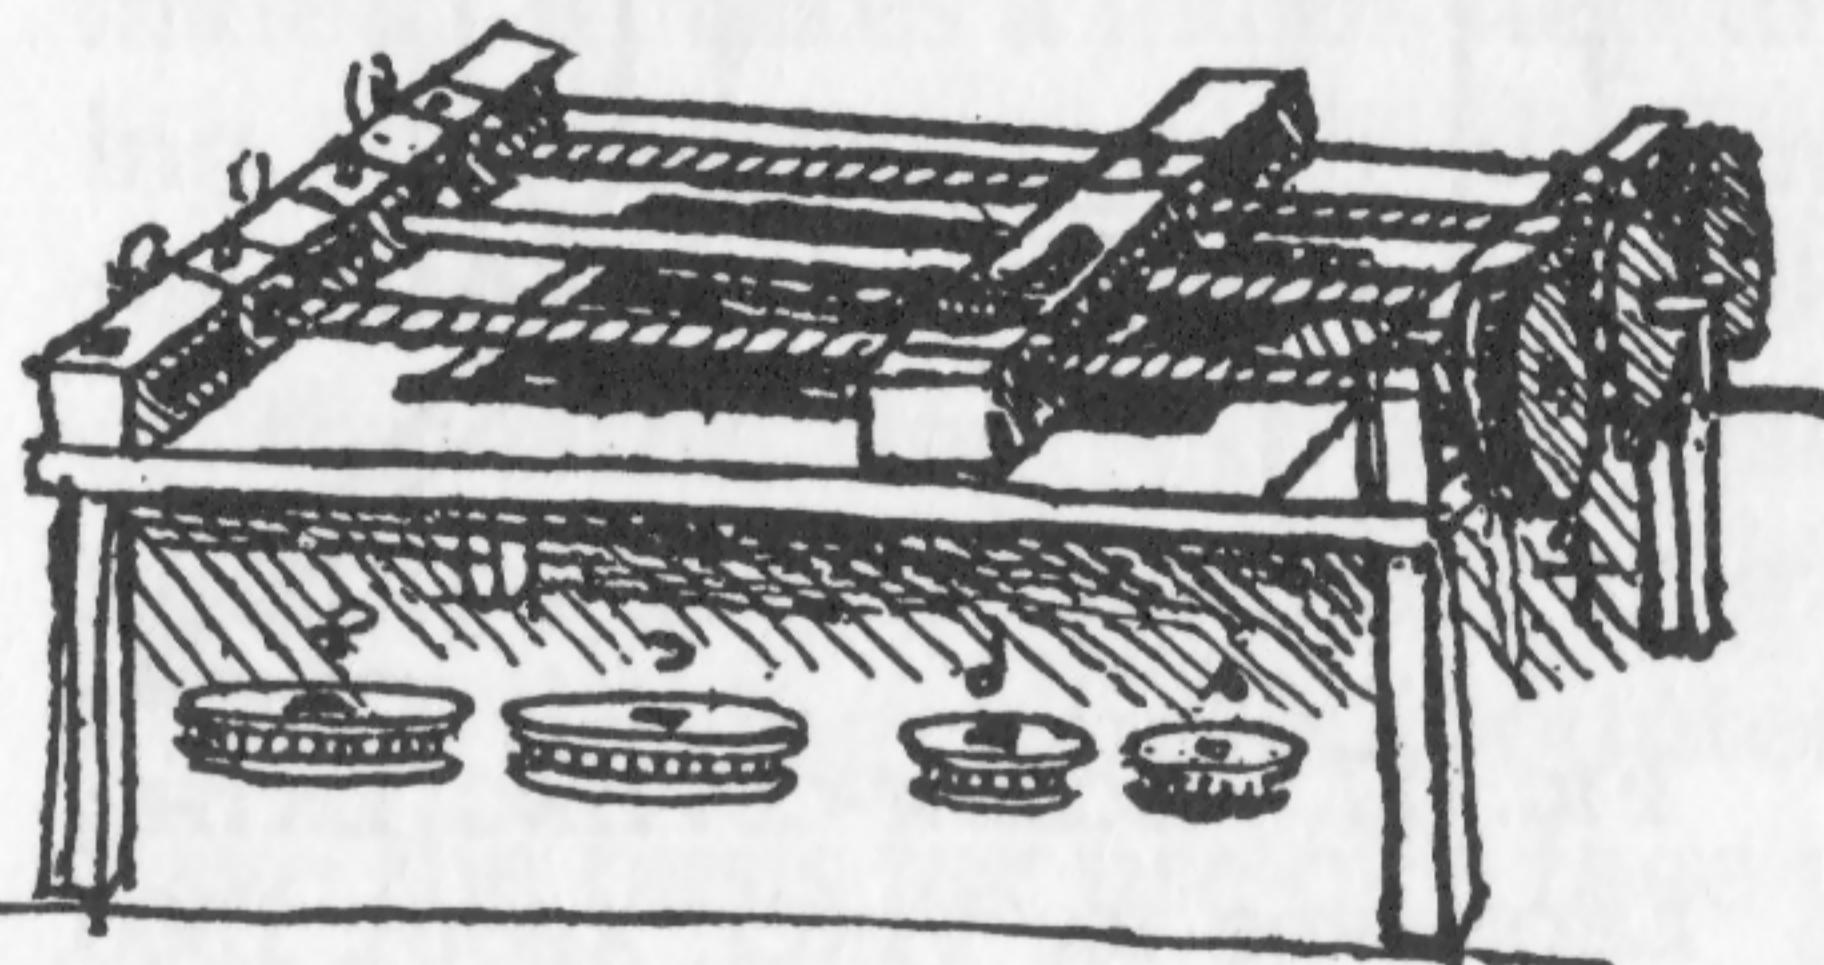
LEONARDO'S SCREW-CUTTING MACHINE, ABOUT 1500.
